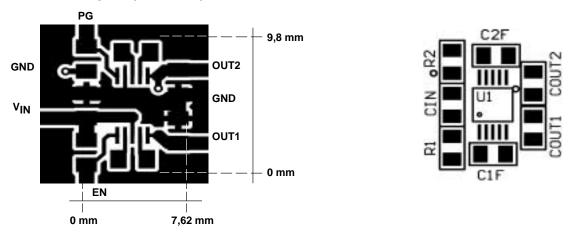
Recommended PCB Layout for TPS6031X (top layer)
